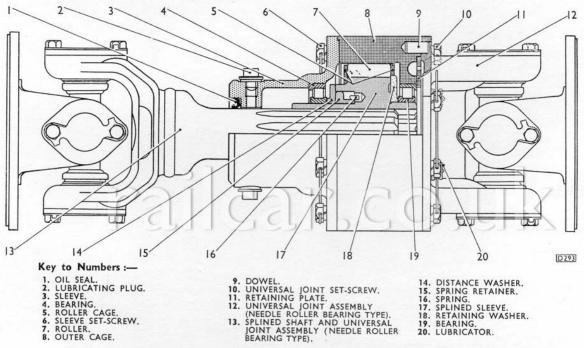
Arrangement of first propeller shaft and freewheel-needle roller bearing type joints.
